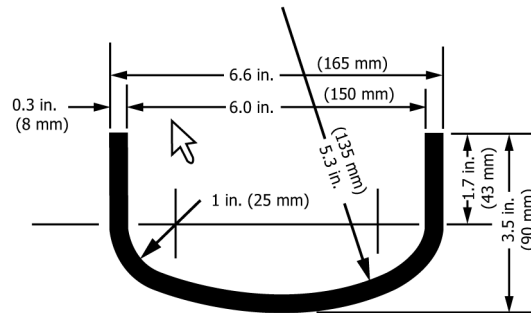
Standard 6-in. (150-mm) Weld Cap
